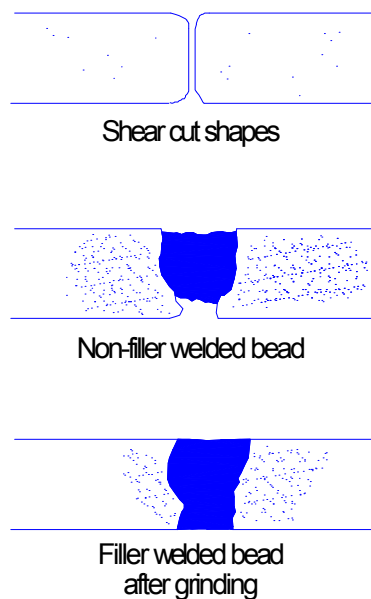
The effect of filler wire use and grinding on a laser beam butt seam weld
